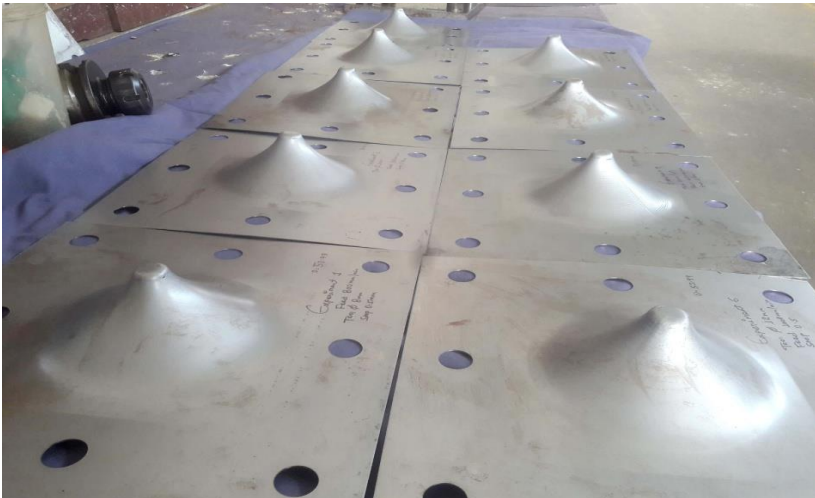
Parts formed based of L9 (3^3) design of experiment.
